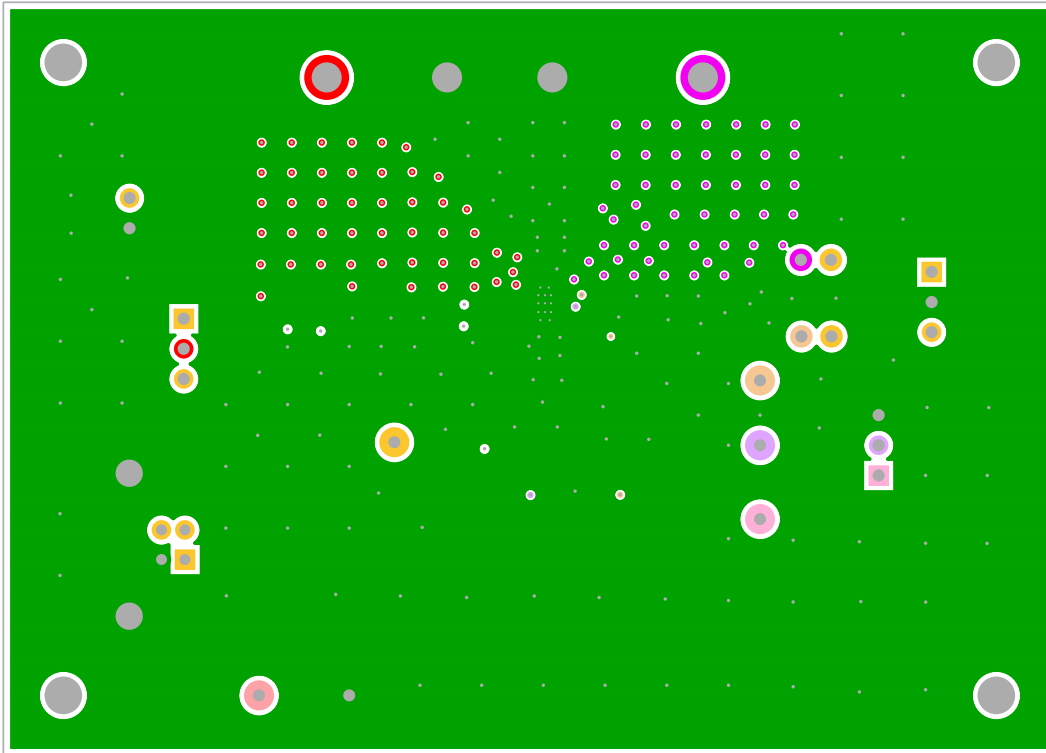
BOTTOM LAYER SOLDER SIDE
